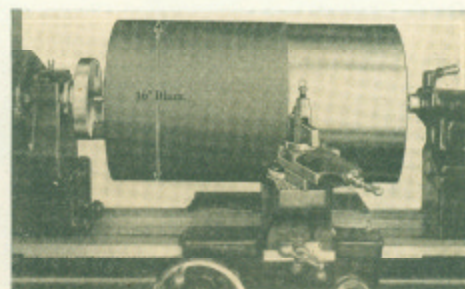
Machining a Steel Roll 16" Diameter and 54" Long on a 16-24-inch x 8 ft. Lathe
